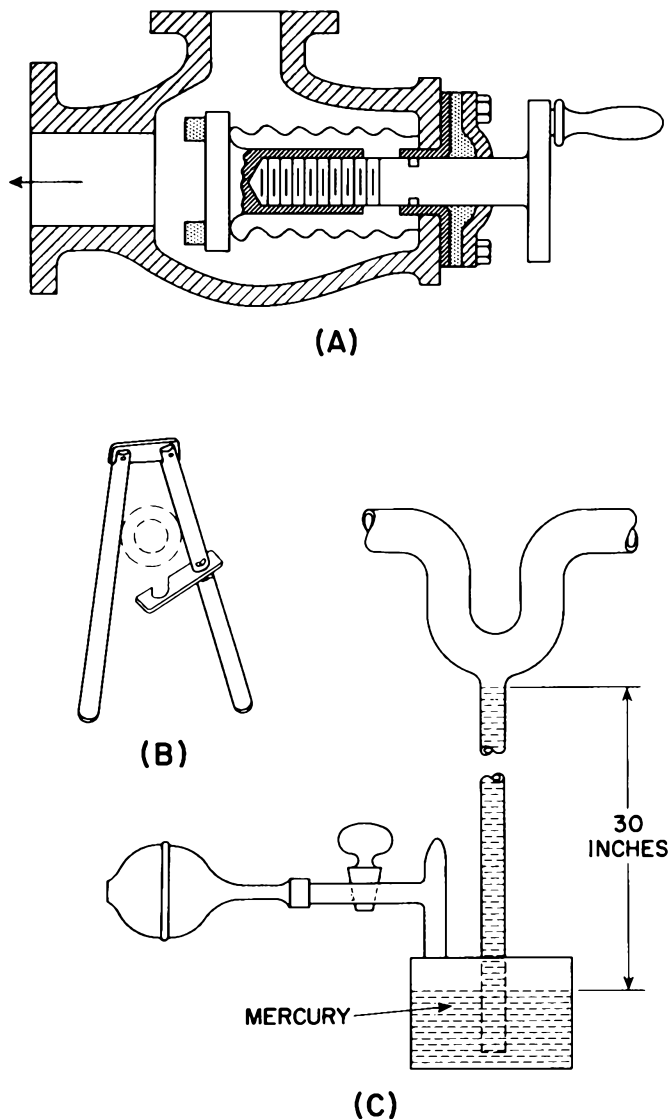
Vacuum Valves: (A) bellows; (B) pinch; (C) mercury
